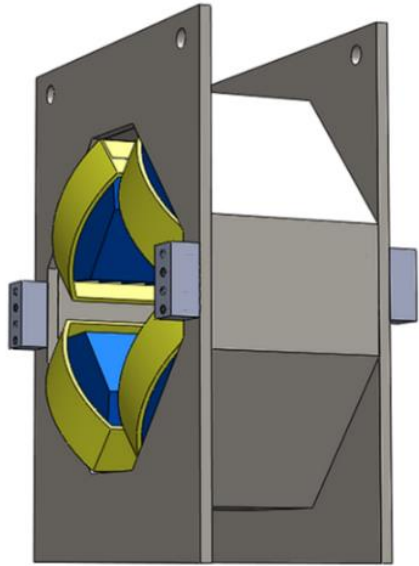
(side view of 3Dmodling for Quadrpool magnet)
